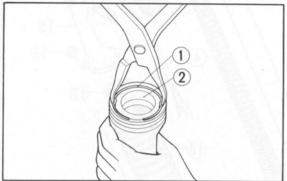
① Oil seal stop ring ② Oil seal
